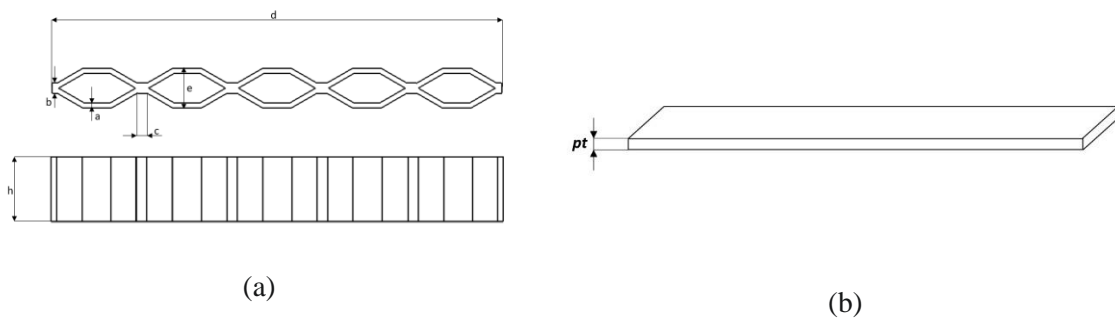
Sandwich structure measured dimensions: (a) core (PLA); (b) face sheet (Aluminum plate)
